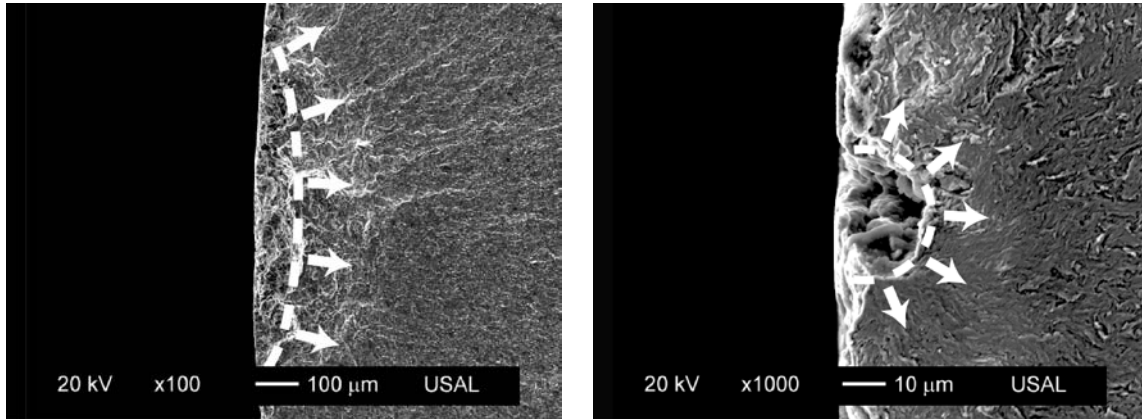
Initiation of fatigue crack growth from a surface defect: hot rolled bar (left) and prestressing steel wire (right), including arrows to identify the fatigue crack growth from defect
